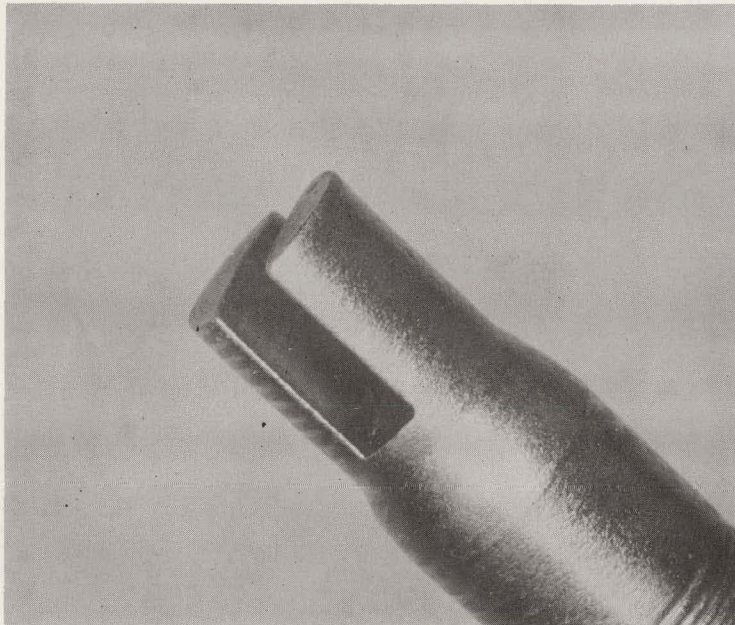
Typical Appearance of a Reduced Shoulder Type End Cap Weld Made on Fuel Rod. Note notch used for assembly attachment.
